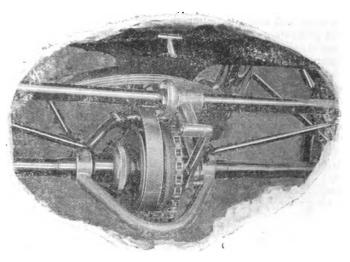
Mason Rear Axle from the Left, showing Brake Drum and Sprocket on Compensating Gear.
